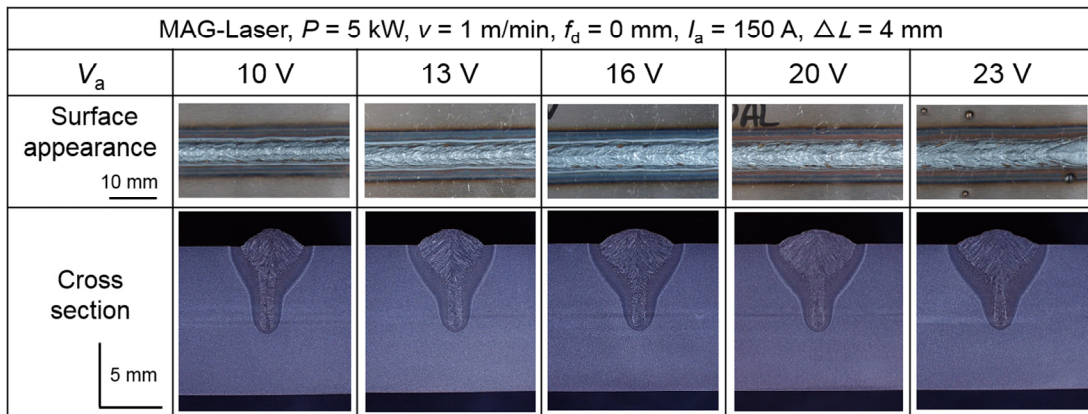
Surface appearances and cross sections of weld beads produced by MAG-Laser hybrid welding at various arc voltages.
